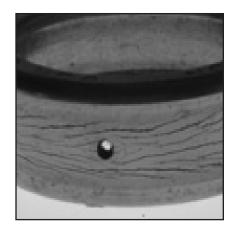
Roll out and fractures on a needle roller bearing outer ring are depicted here.
